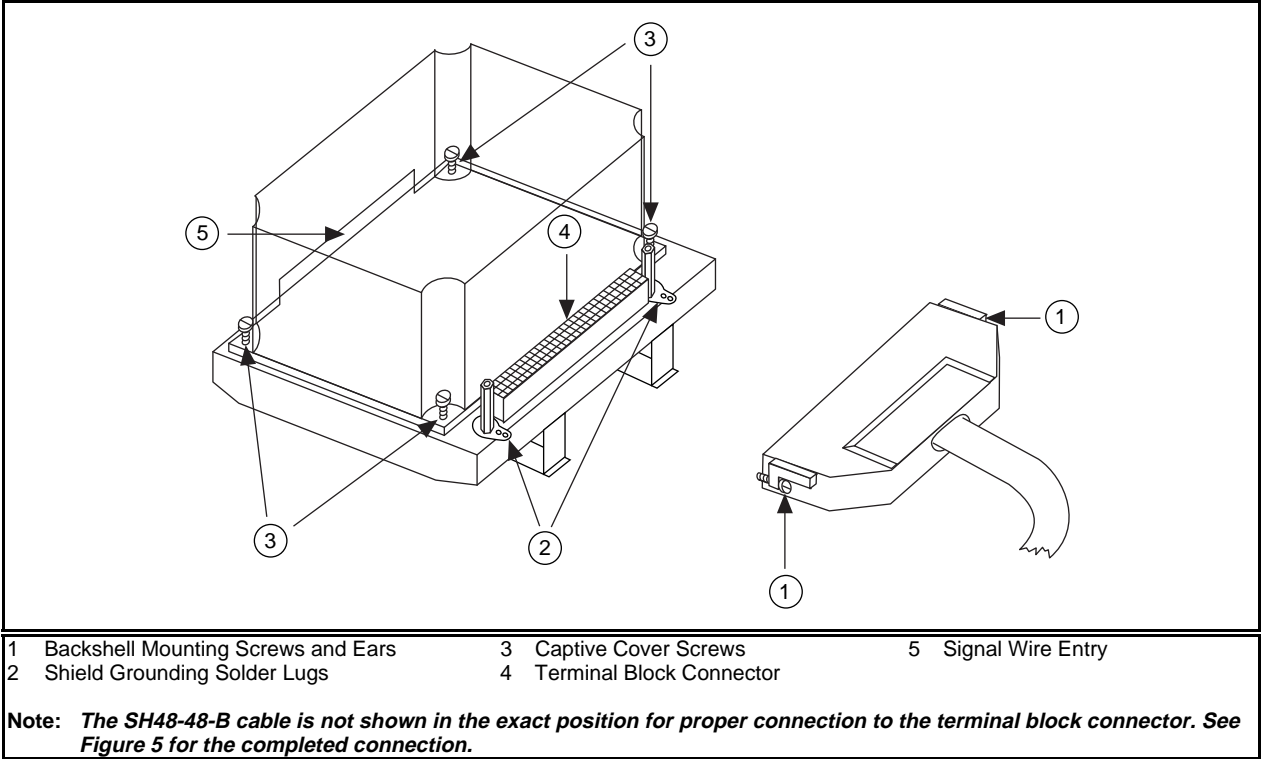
Connecting the SH48-48-B Cable to the TBX-1325 Terminal Block
